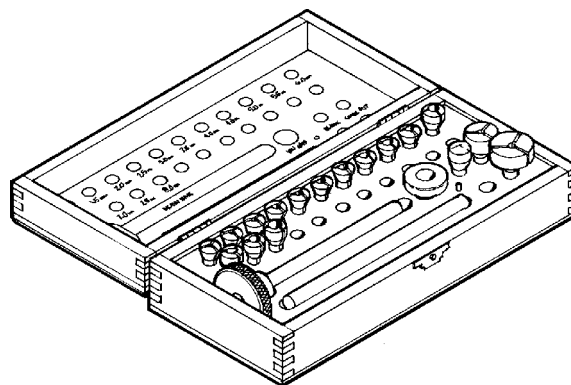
Deluxe Collet Set in Wooden Box (P/N 1162, American—P/N 1179, Metric).
